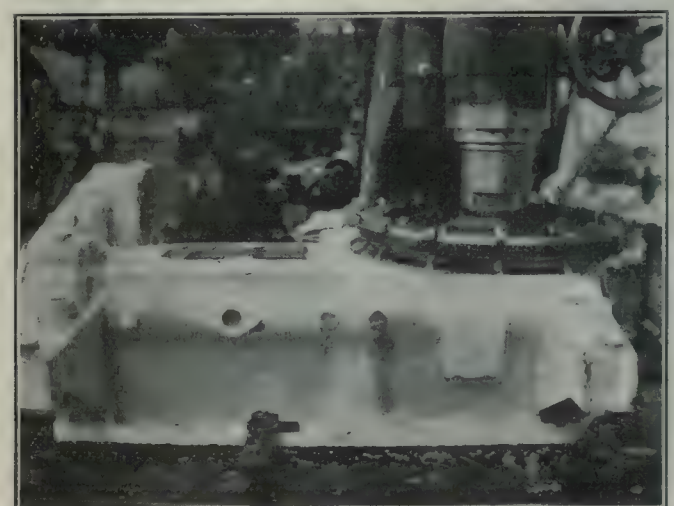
MILLING CYLINDER SEATS ON CRANK CASE.
